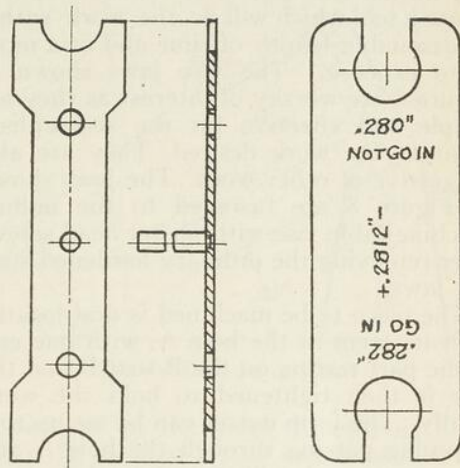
Die Templet FIG. 2—Snap Limit gauge
